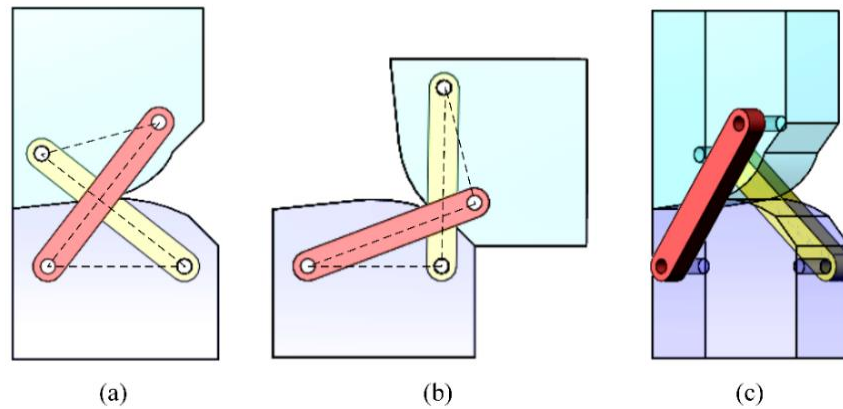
Contact-aided CFB mechanism: (a) Initial position; (b) Final position; (c) Side view of the assembly.
